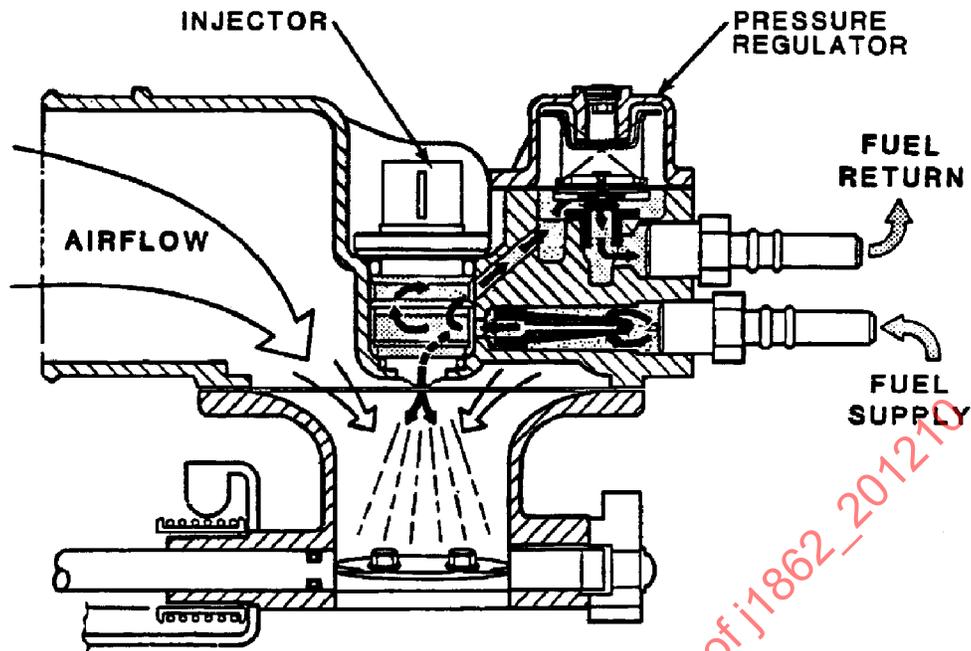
FUEL CHARGING ASSEMBLY-CFI-CENTRAL FUEL INJECTION
